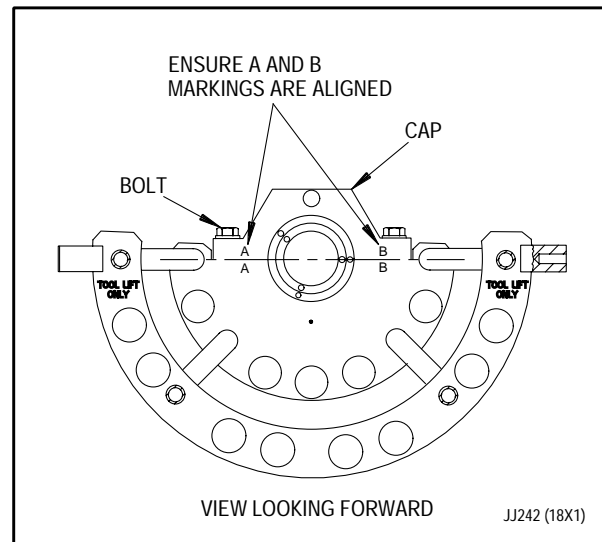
Front Compressor Drive Turbine Rotor and Stator Assembly - Balancing Tooling Removal (Sheet 2 of 6)
